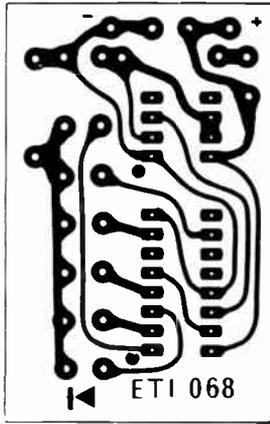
Printed-circuit board layout for the LED dice. Full size 55mm x 35mm.
